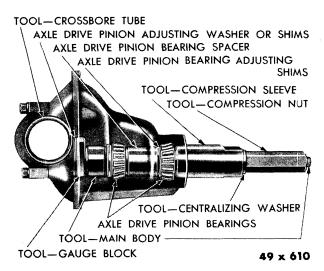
Main Body, Bearings, Spacer and Shims Installed (Tool C-758-D2)
